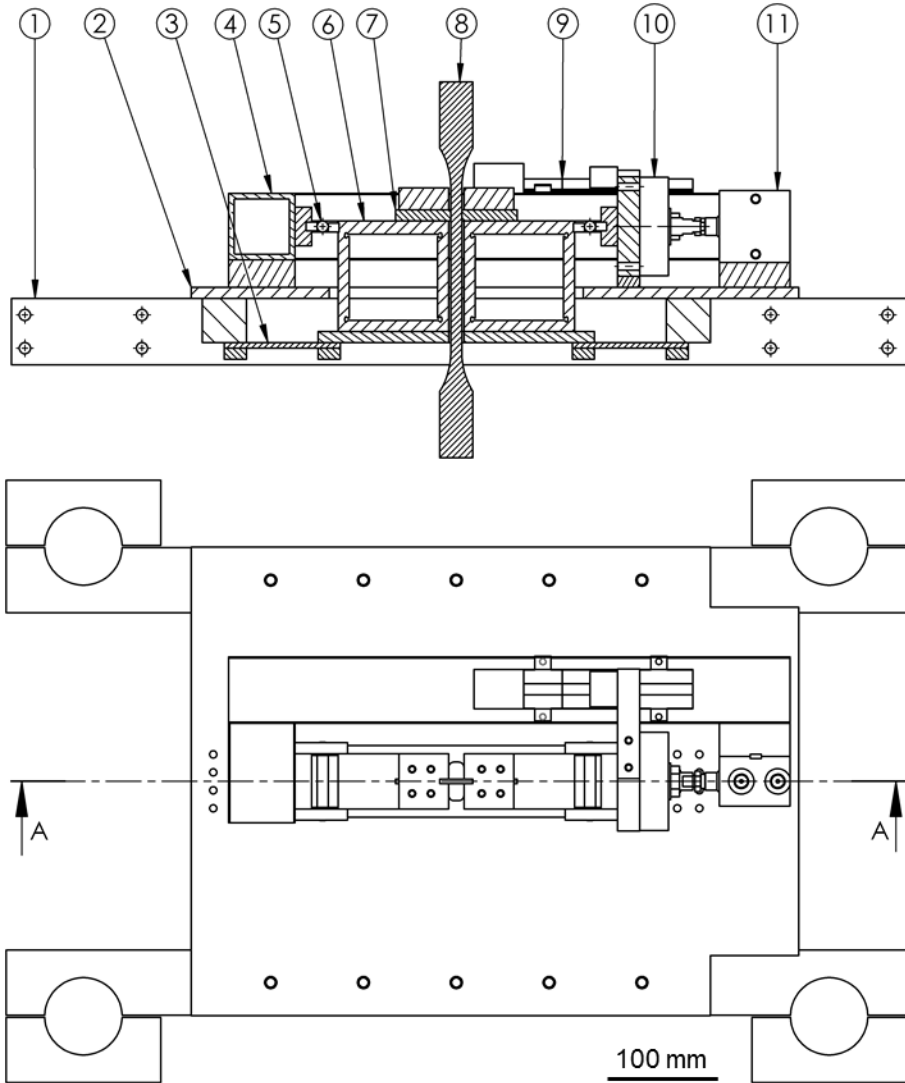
Section view and top view of the fretting fixture. 1) horizontal support, 2) base plate, 3) leaf springs, 4) C-beam, 5) roller bearing, 6) pad holder, 7) pad, 8) dog-bone specimen, 9) displacement sensor, 10) load cell, 11) hydraulic actuator [De Pauw, 2016]
